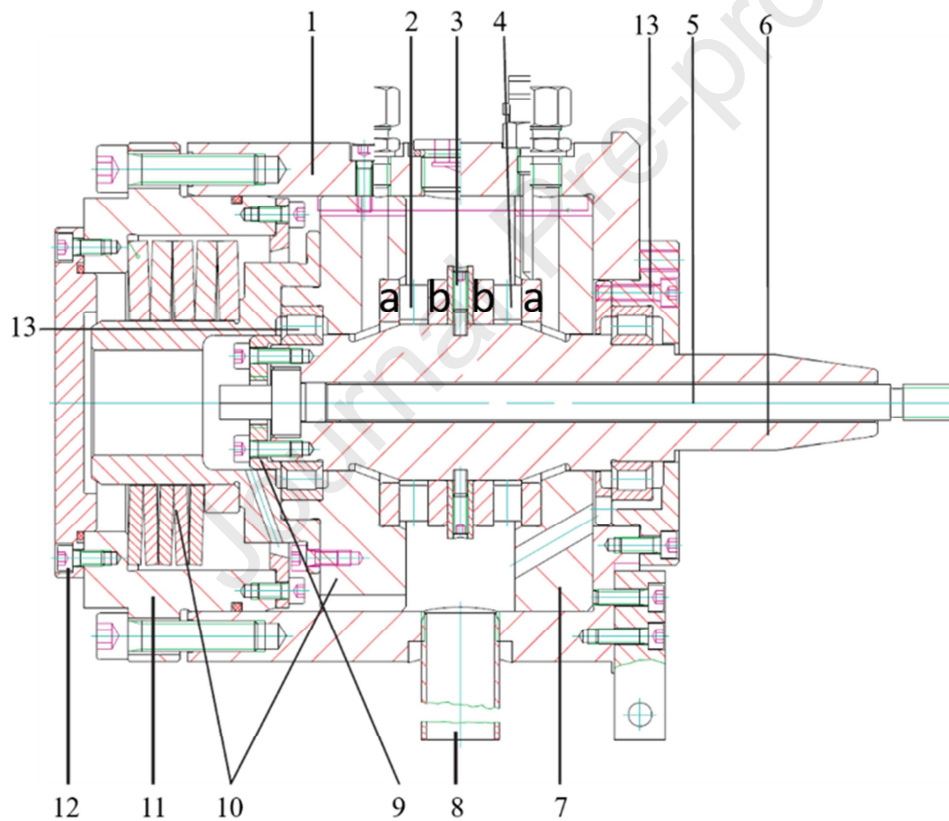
Test head with axial cylindrical roller bearings. 1 housing, 2 test bearing 2, 3 spacer, 4 test bearing 1, 5 shaft, 6 clamping bolt, 7 bearing seat, 8 drain pipe, 9 cap, 10 bearing support with screwed-on pilot pin, 11 lid cup of spring package, 12 lid, 13 auxiliary bearing. Both test bearings consist of a housing and a shaft washer. The two shaft washers (b) are mounted on the shaft and rotate during testing; the two housing washers (a) are embedded in the housing/support.
